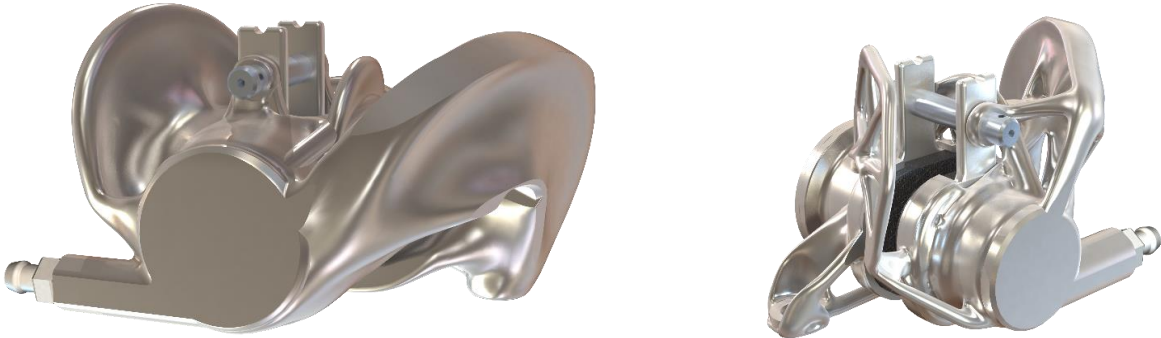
Front caliper (left) and rear caliper (right) assemblies
